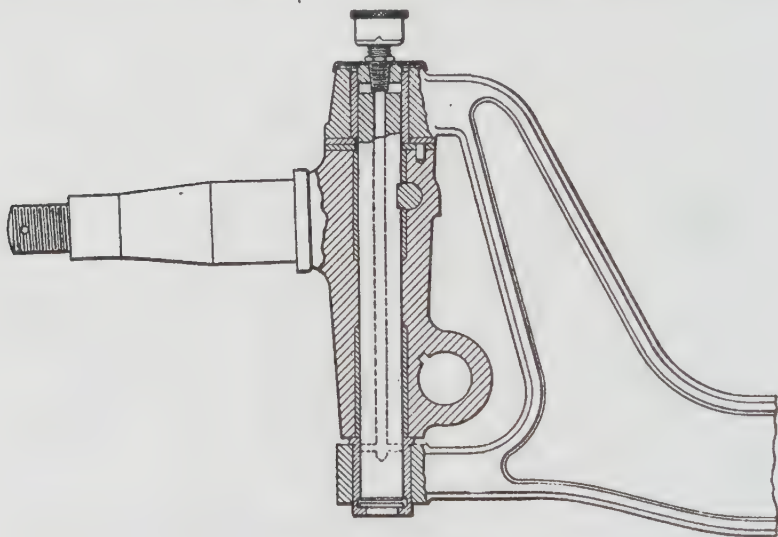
ELLIOTT TYPE STEERING HEAD WITH BEARINGS IN STEERING FORK.
